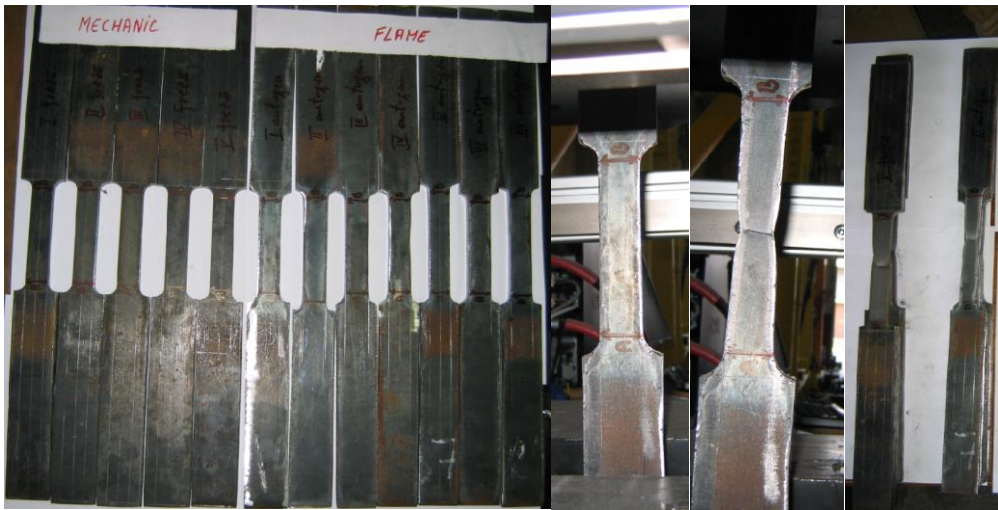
BRB steel plate specimens (5 for mechanical cut and 6 for flame cut)
